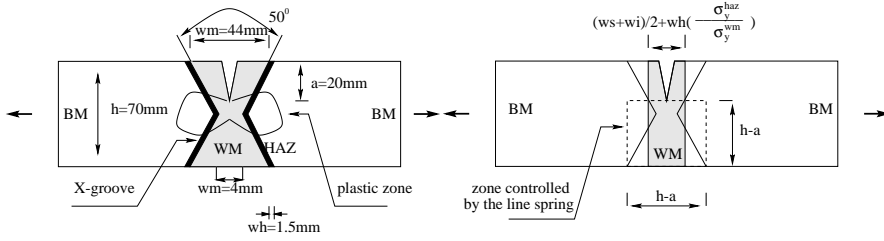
Representation of the weldment in the 3D and 2D case
